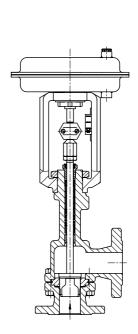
· Type 3258-1 Pneumatic Control Valve
